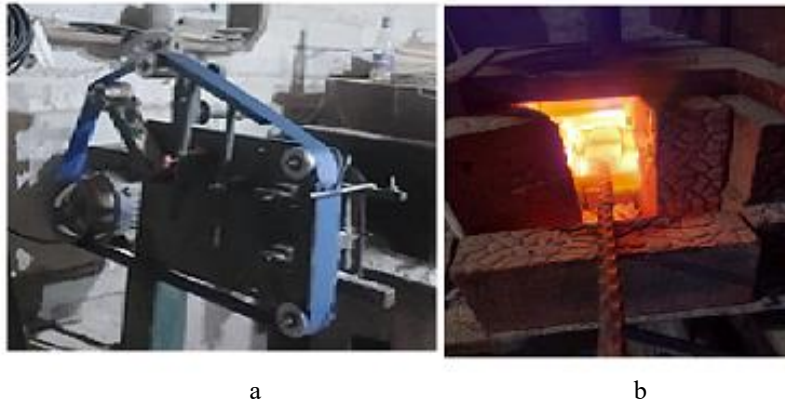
Equipment designed and made to manufacture test samples of Damascus steel: a – equipment for removing oxides from strips; b – furnace for heating the samples in order to forge the package of strips solidarized between them by means of short welding cords.
